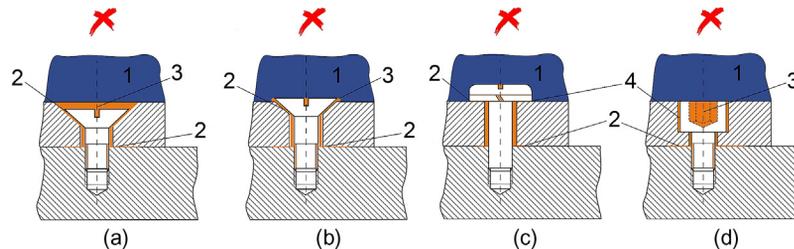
Screws may not be exposed to food product (1) because debris collects in the screw drive, because they give rise to metal-to-metal contact corrosion (2), and because they create gaps, dead areas (3) and crevices (4). Countersunk screws with slots or other drive configurations are not recommended for the reasons mentioned, and incorrect machining of the countersunk hole may cause the screw to either (a) form a pocket in which debris collects or (b) to protrude into the product flow giving rise to circumferential crevices where debris may become trapped. (c) Pan, dome, round and truss screws are not suitable because they protrude in the product flow. (d) Socket head cap screws are not allowed in the food area because debris accumulates in the recess or socket to fit an Allen wrench for turning. In addition, the use of counterbores is not recommended for all the reasons mentioned earlier (CFPRA, 1983; Lelieveld et al., 2003; Hauser et al., 2004b).
